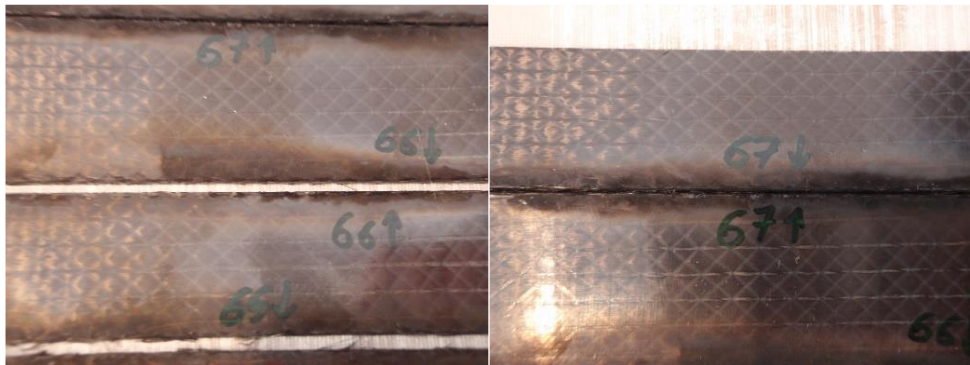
Images of top side laser cut surfaces of tests 66 (left) and 67 (right).
